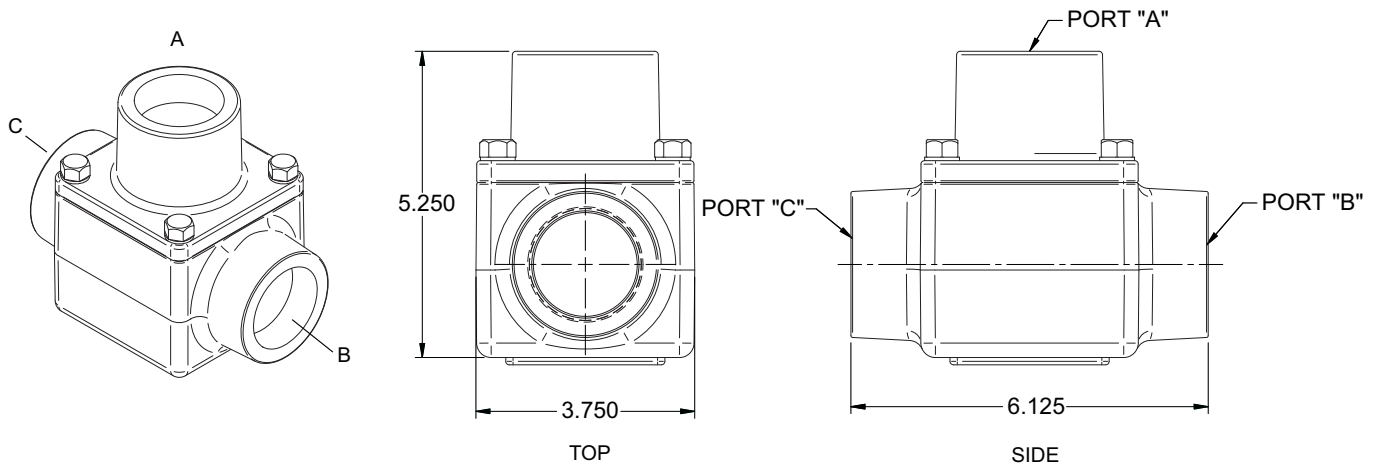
2" LTV Valve - Up to 750,000 Btu/hr
